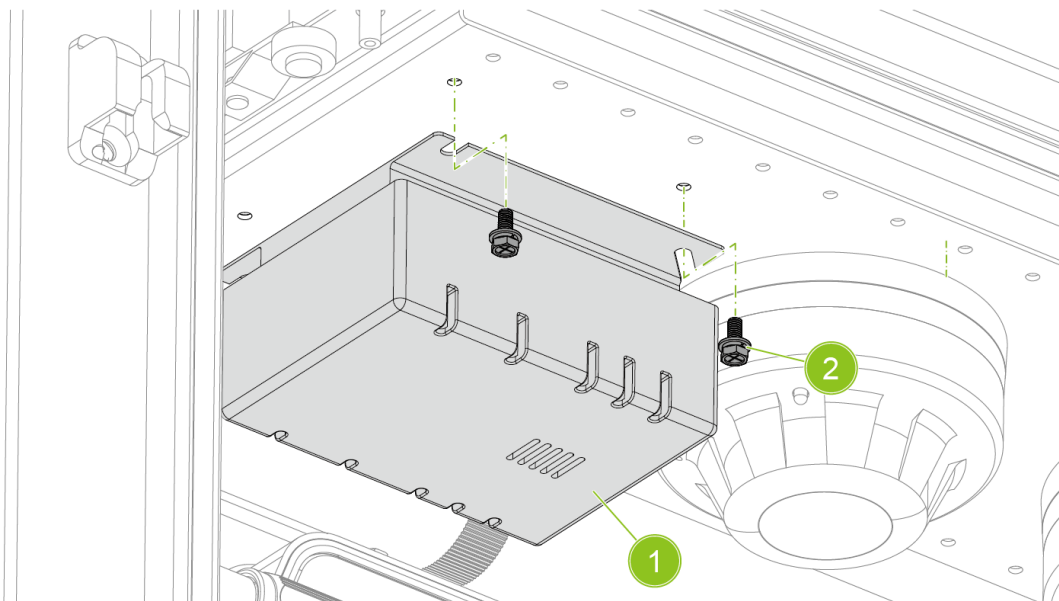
Remove the fixing screws of the combustible gas detector
